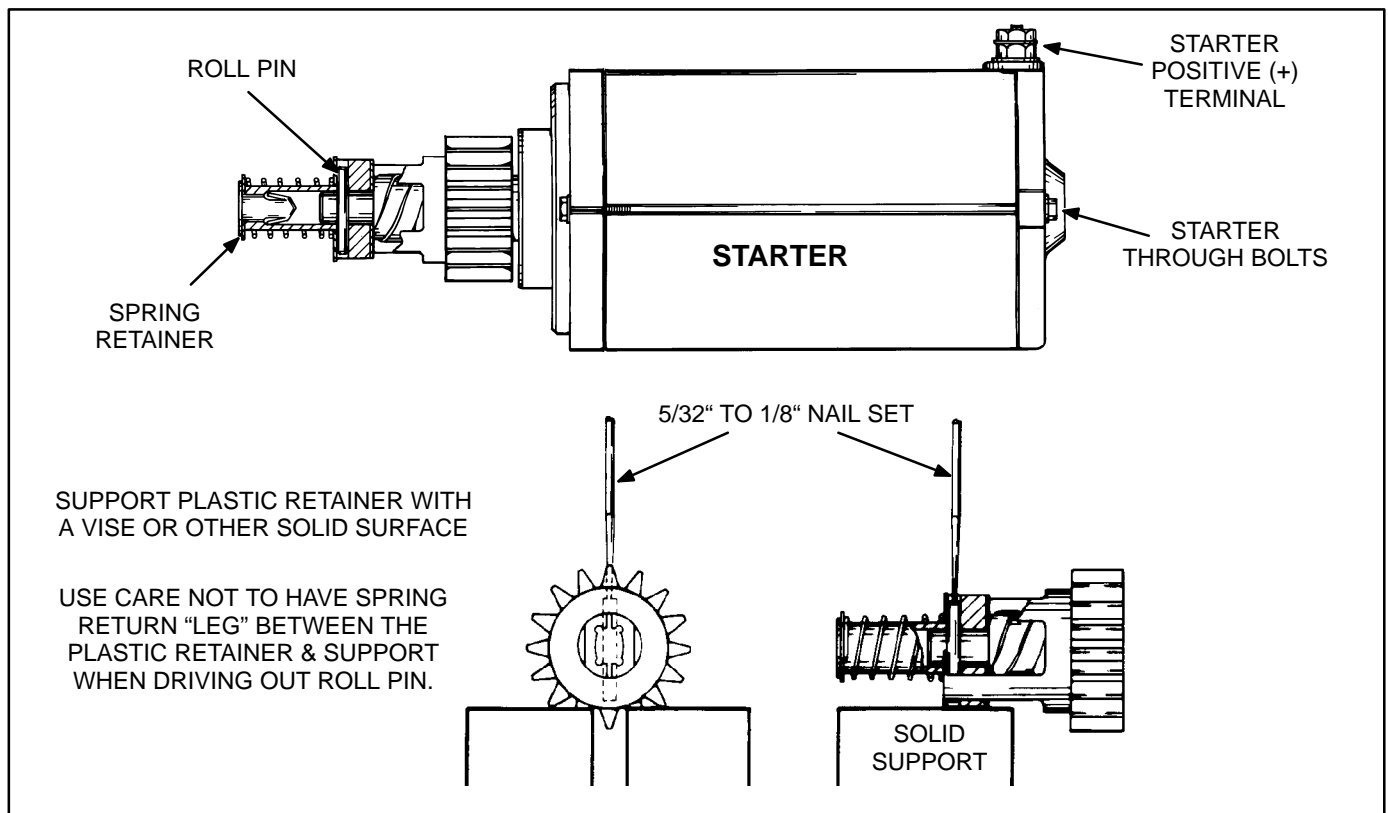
DRIVING ROLL PIN OUT OF STARTER ASSEMBLY
